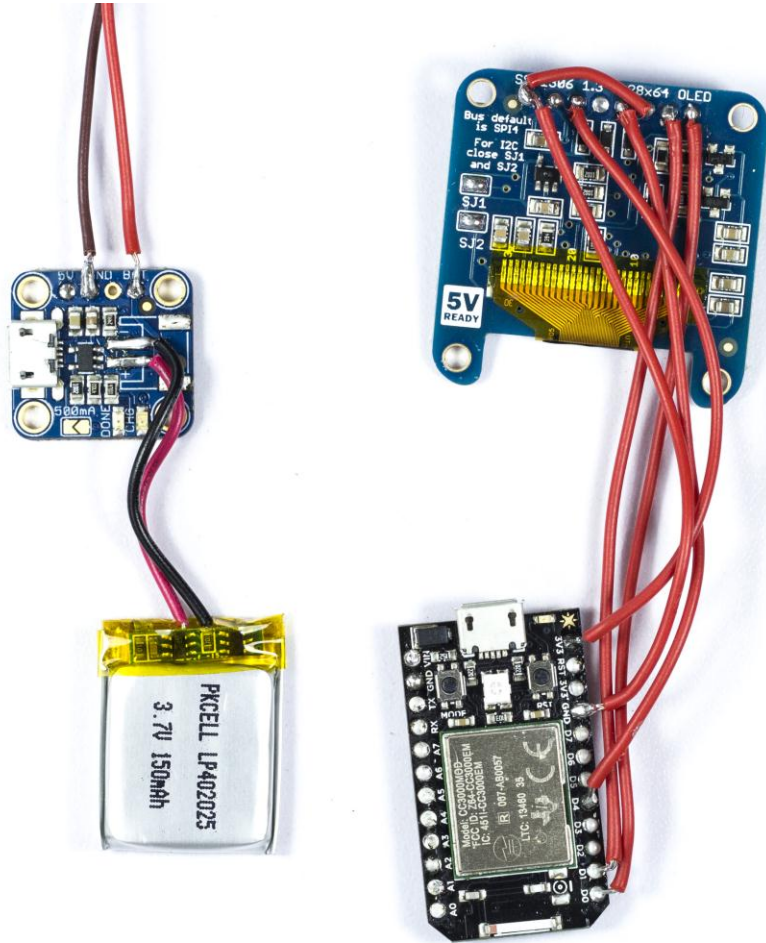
The battery and charging circuit soldered together with the screen and Core board
